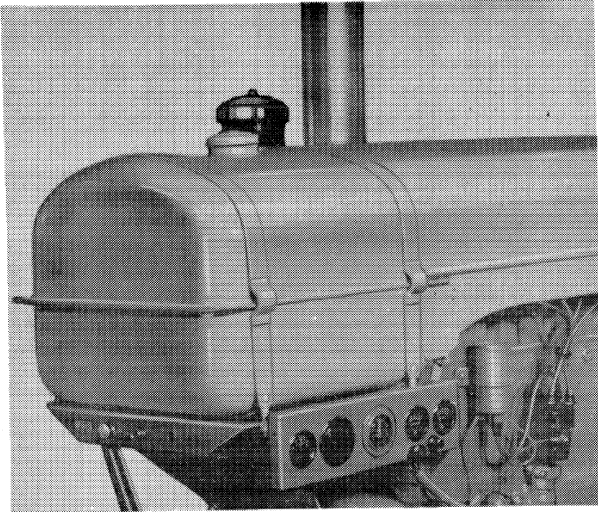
400 Series Spark Ignition Engine Unit Equipped with Fuel Tank - Right Hand Side
